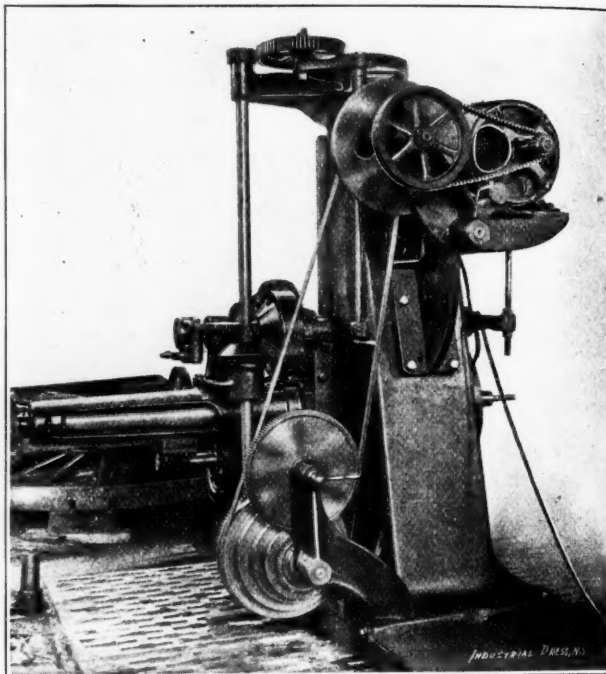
Floor Boring Machine, Electrically Driven, Renold Chain.
